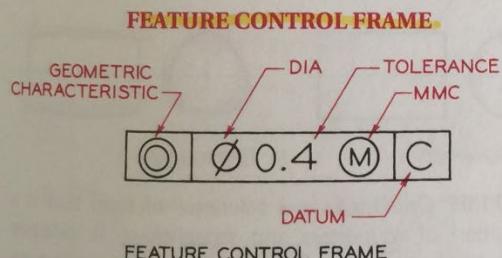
This typical feature control frame indicates that a surface is concentric to datum C within a cylindrical diameter of 0.4 mm at MMC.
